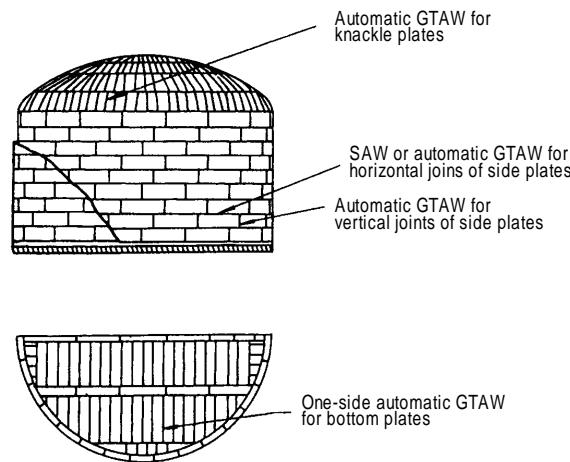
Typical applications of automatic welding processes for a LNG storage tank
